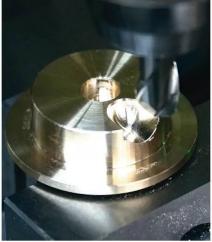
I ignored the drawings for the steam passage past the cover and did it the easy way.
